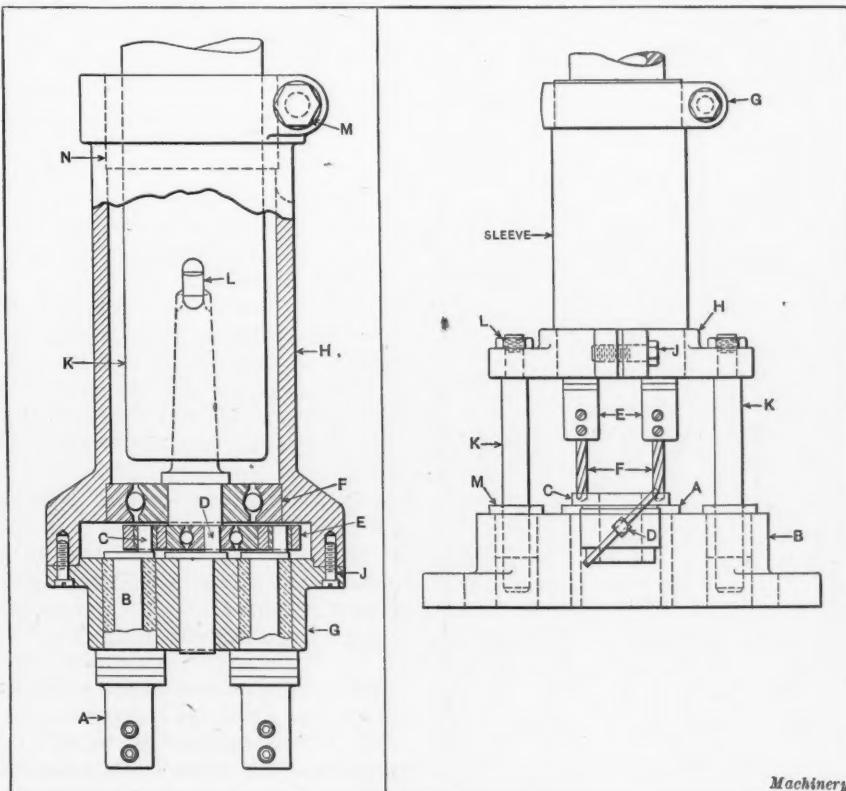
Eccentric Drive Type of Drill Head Fig. 17. Drilling Two Spanner Wrench Holes in Nut
